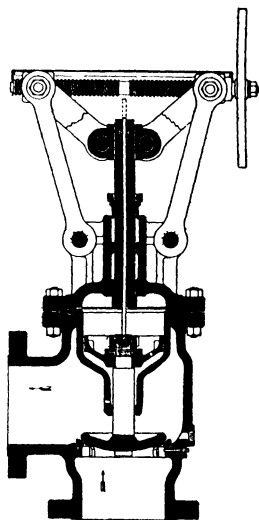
High-pressure automatic non-return boiler stop valve with toggle for closing the valve and unloading rod through the valve stem which provides an unbalanced area that largely counterbalances the weight of the valve disk and piston. (Schulte and Koerting Company.)
